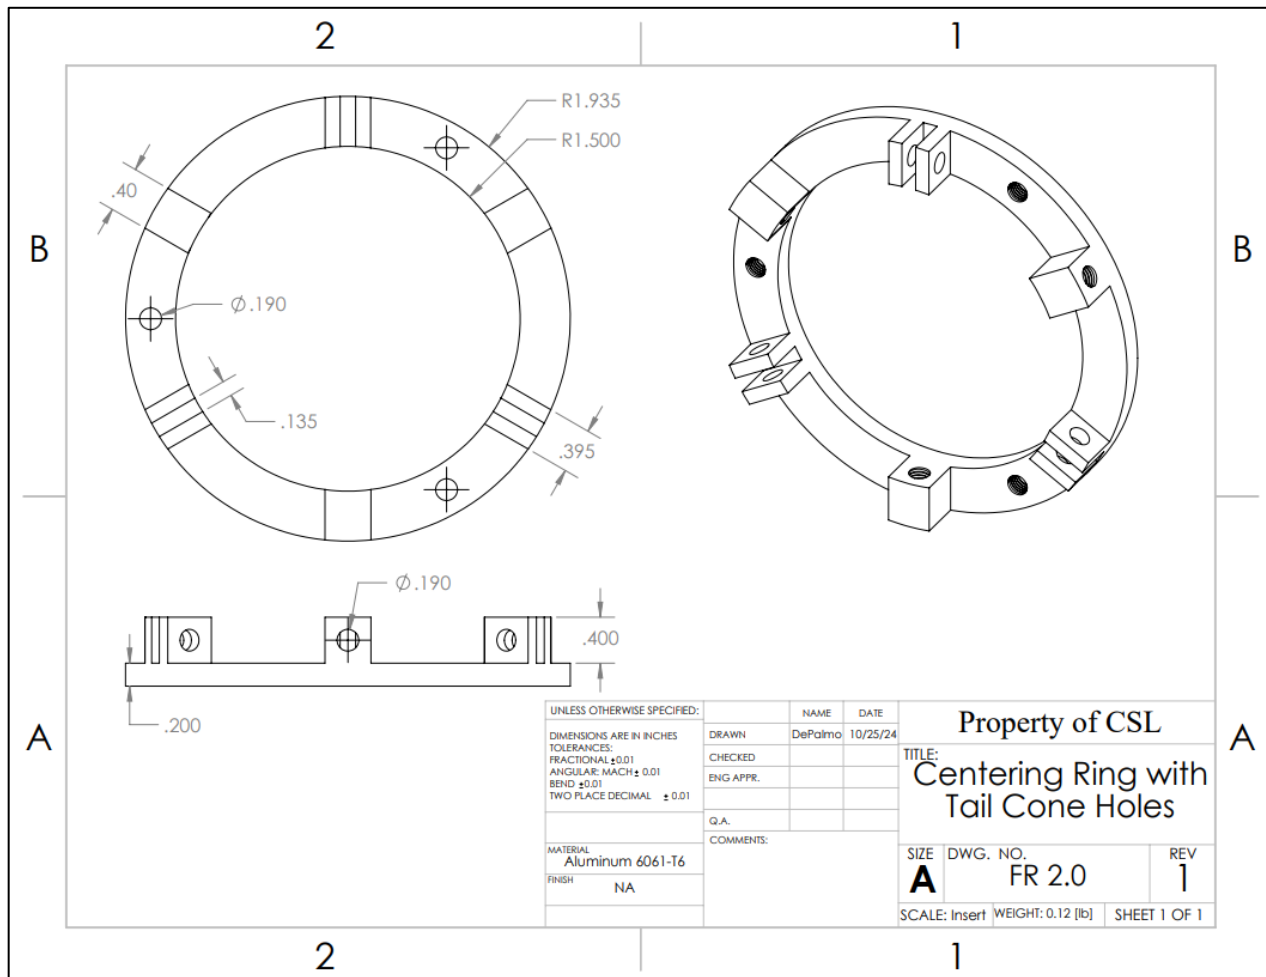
Dimensioned SolidWorks Drawing of Centering Ring with Tapped Tail Cone Holes.
